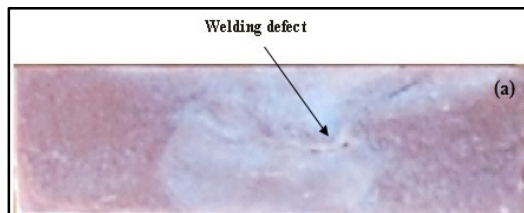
Defects in Welded Work Pieces Prepared at Tool Rotation Speed of 1200 rpm
